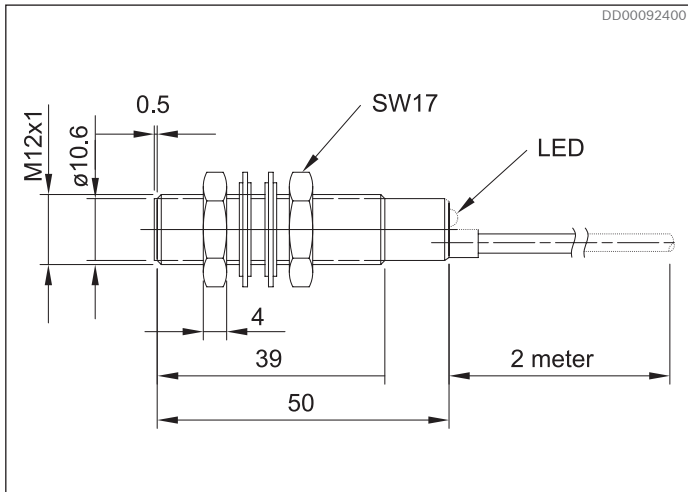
Dimensions inductive position sensor for BICA 13 to BICA 134
